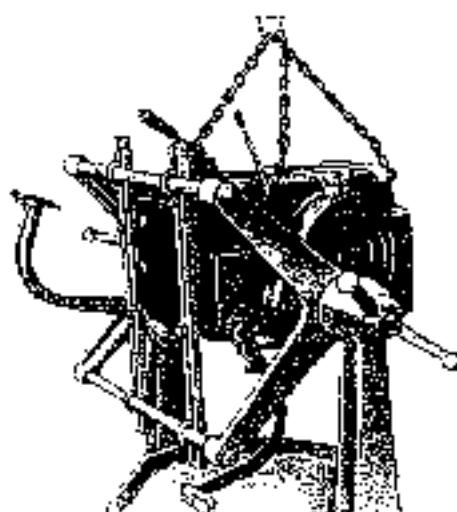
Transmission casing mounted on rotary stand ARR 2204.
